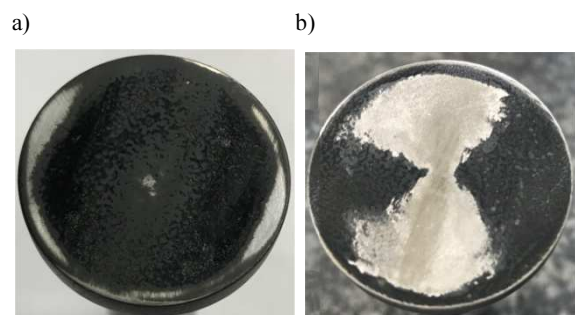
Push rod with RGC coating after grinding, before (a) and after (b) 50 h of testing in engine
